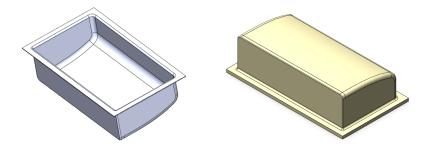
The designation of composite mold (left) and master plug (right) of the product B.
